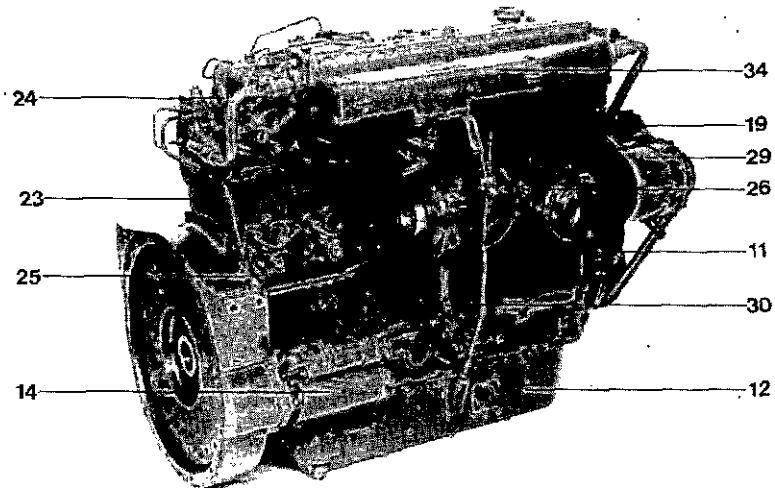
Rear/right side of T6.3544 charge cooled engine
